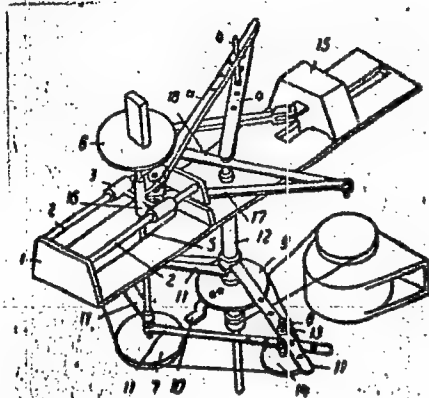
1--frame; 2--guides; 3--sleeves; 4--crankshaft connecting rod mechanism; 5--table shaft; 6--table for devices to be tested; 7--sprocket; 8--chain drive; 9--sprocket; 10--base of the unit; 11--levers; 12--sleeve of the frame; 13--intermediate axle; 14--sprockets; 15--weight; 16--shaft sleeve; 17--levers; 18--rocker
